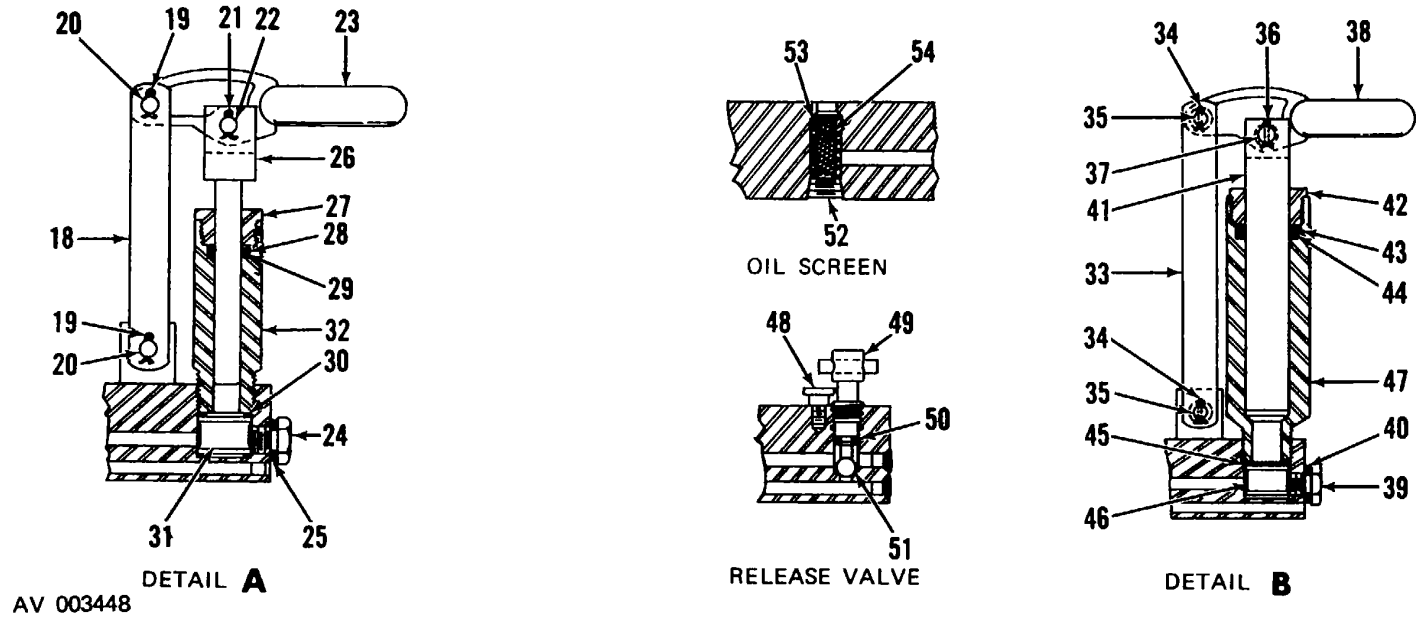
Part No. 986CS, 25-Ton Hydraulic Tripod Jack, Exploded View (Sheet 2 of 3).
